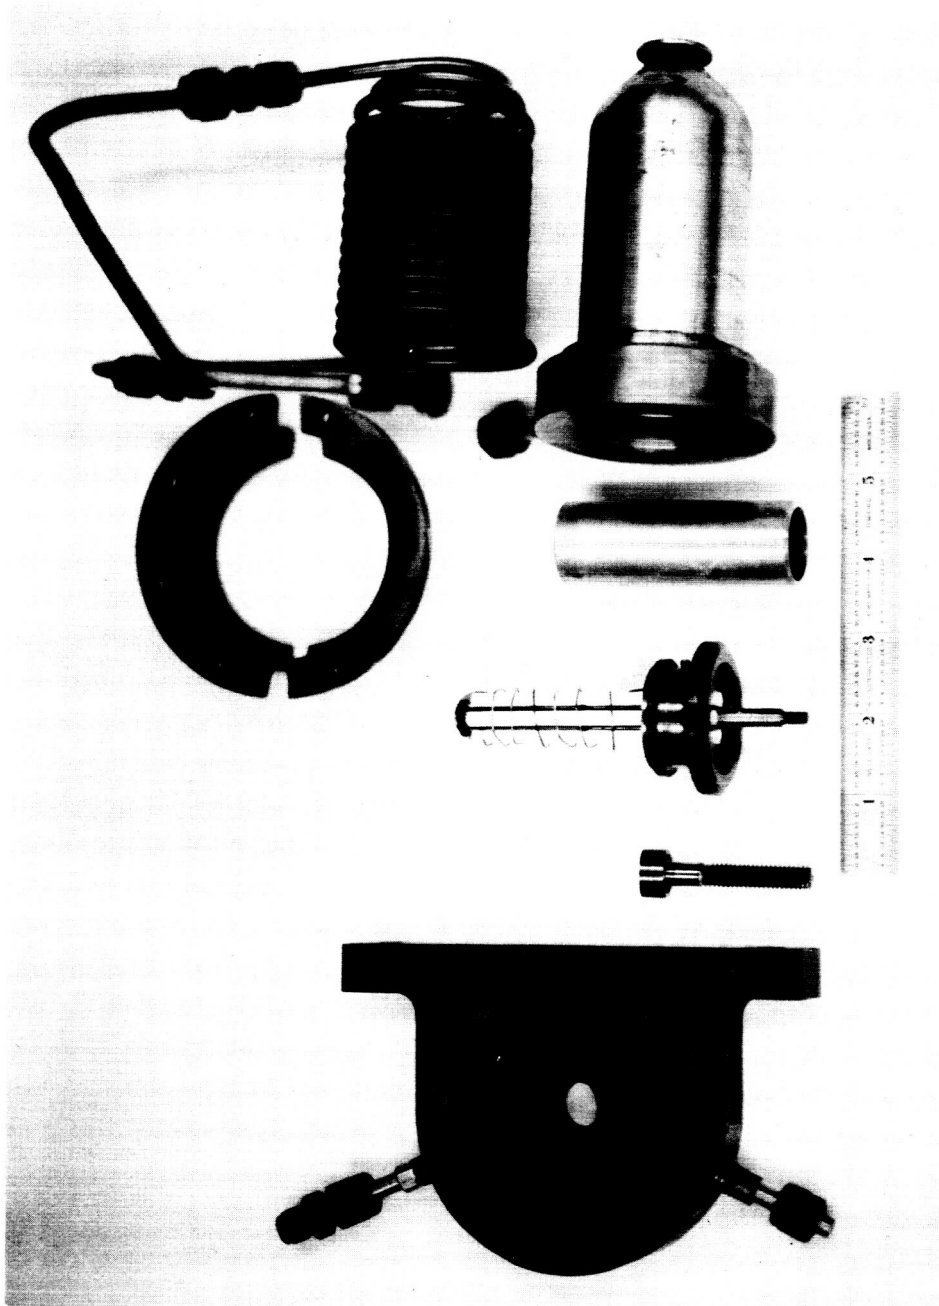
MARK III, MOD 1 THRUSTOR, DISASSEMBLED
